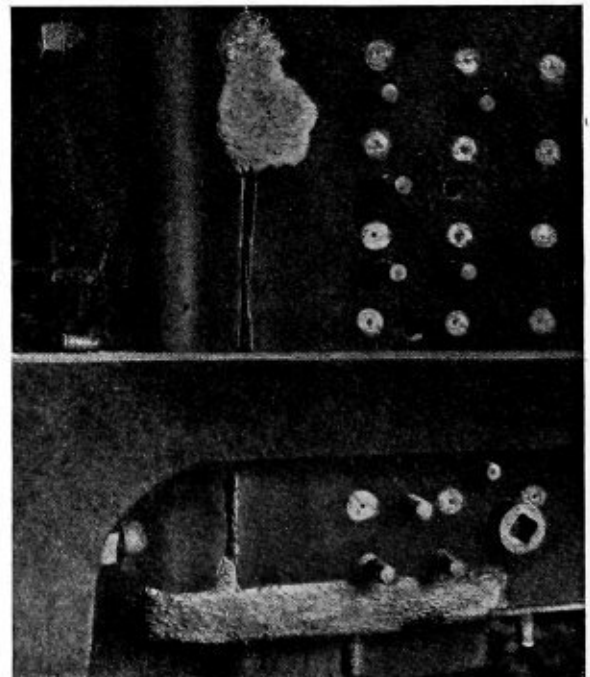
Worn Outside Sheet of Mud Ring and Reinforcements Where Rubbed by Spring Hangers
